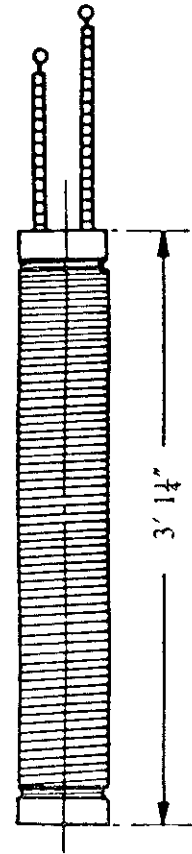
CRACKER HEATER PACKED IN CRACKER
